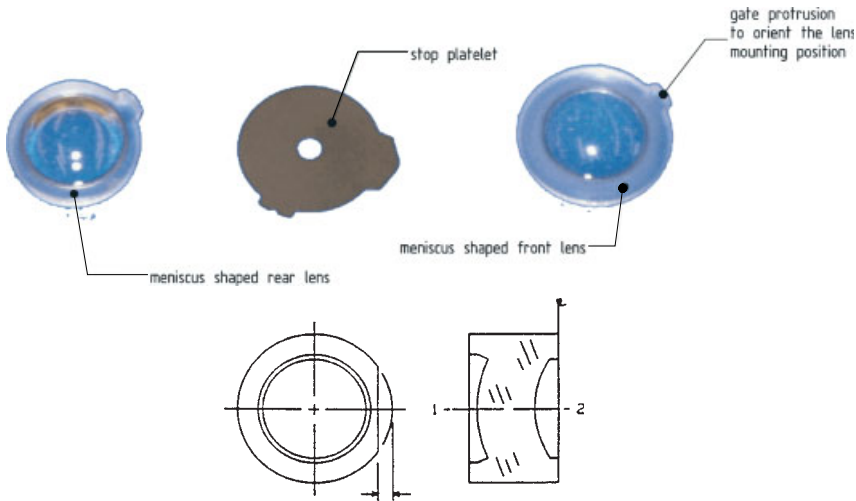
Top: components of the objective lens system of a single-use camera consisting of a meniscus-shaped rear lens, a stop platelet made of steel, and a meniscus-shaped front lens. Note the mounting flange and the gate protrusion to orient the lens mounting
